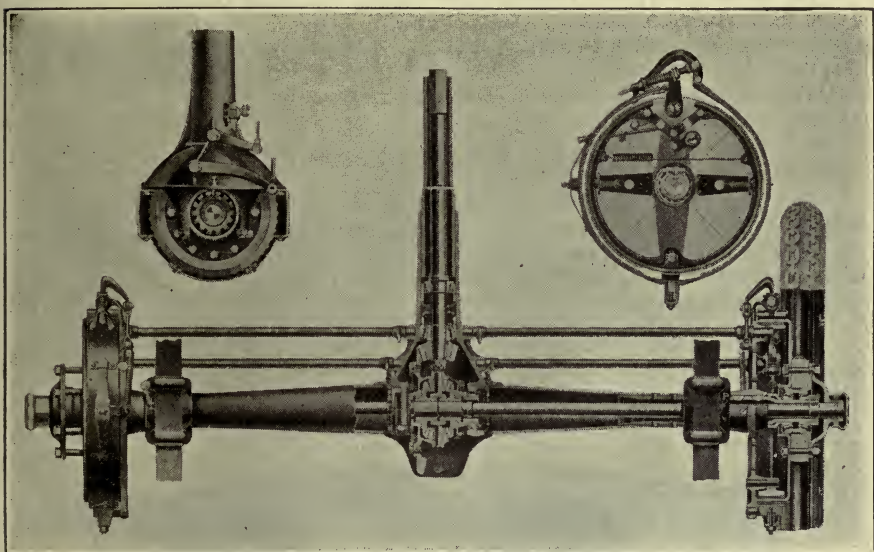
Dodge Rear Axle and Brake Adjustments.
